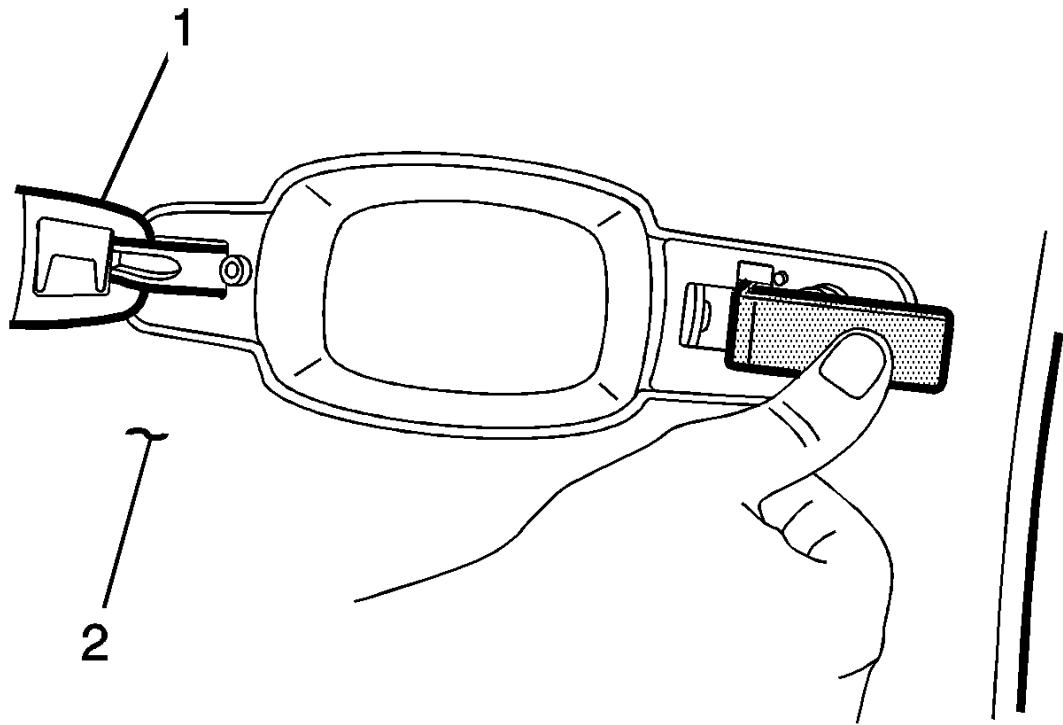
Front Side Door Outside Handle At 90 Degrees
